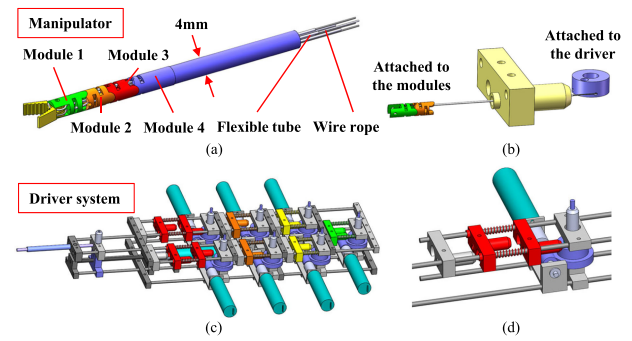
Robotic system. (a) The manipulator; (b) The close-up view of one wire rope and tube configuration; (c) The driver system; (d) The close-up view of a single driving unit.
